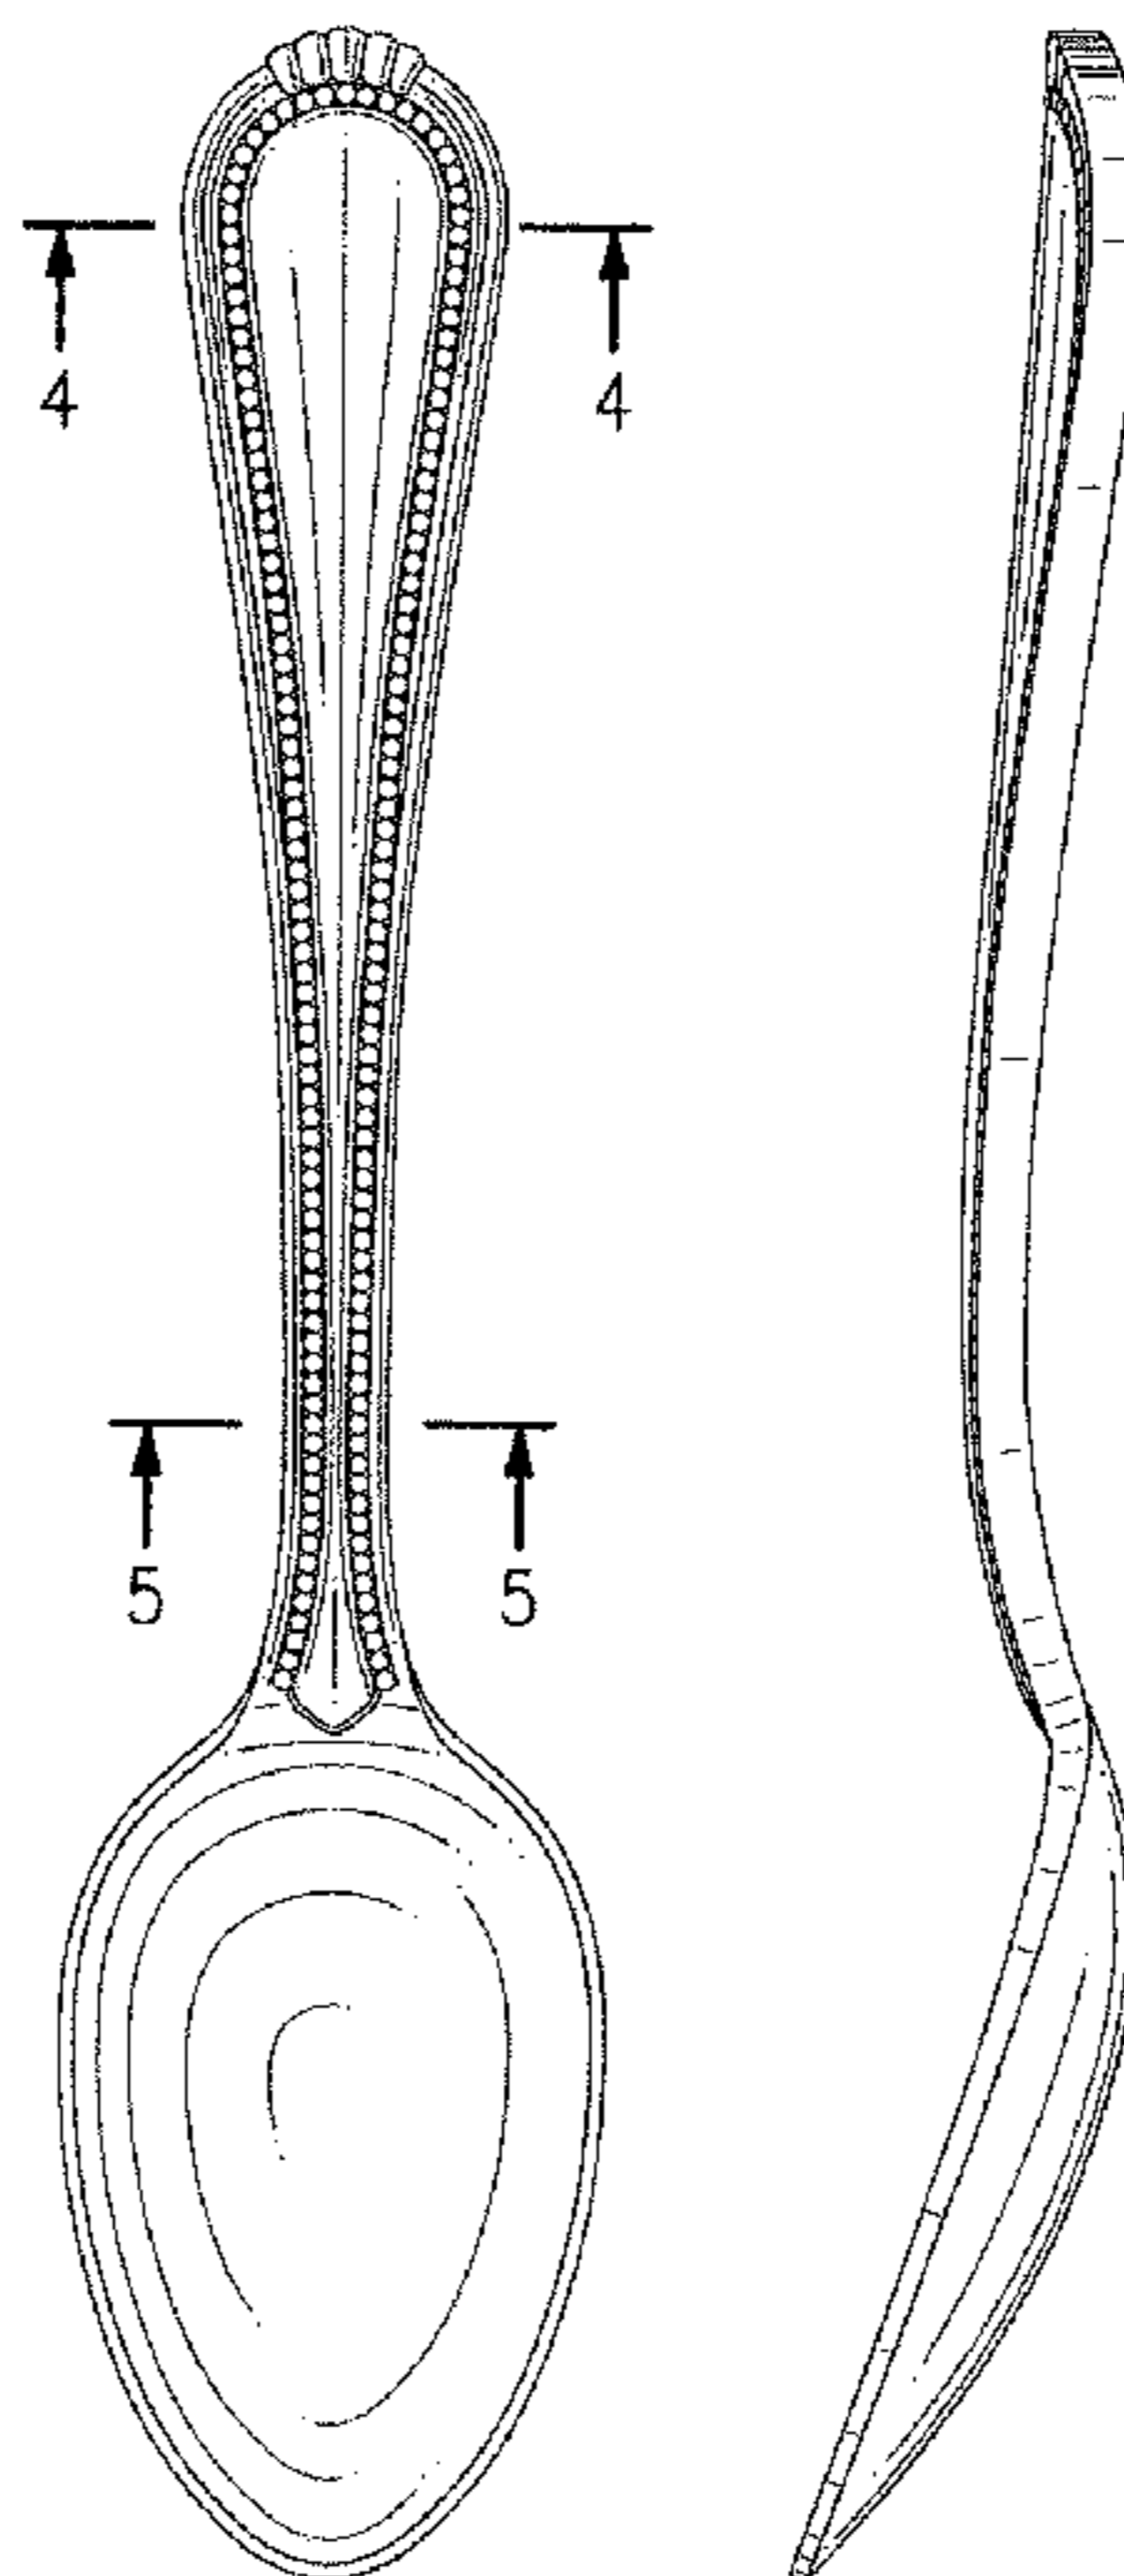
is a right side view thereof, the left side view being a mirror image;
